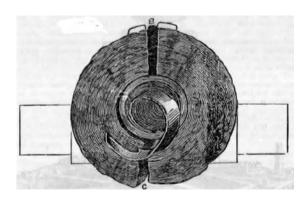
View from breech of burst Palliser conversion showing intact wrought-iron coil and split cast-iron body (The Engineer)
